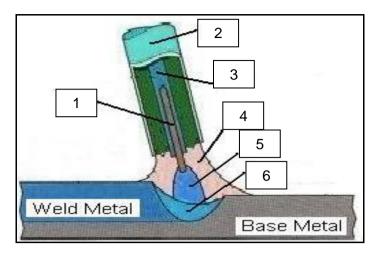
Gas Metal Arc Welding (GMAW)
